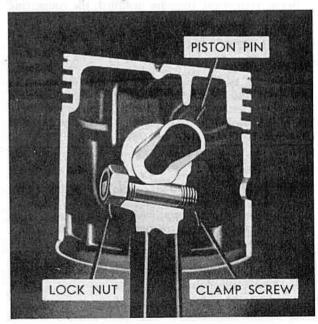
Construction of the Piston Pin and Clamp Screw
